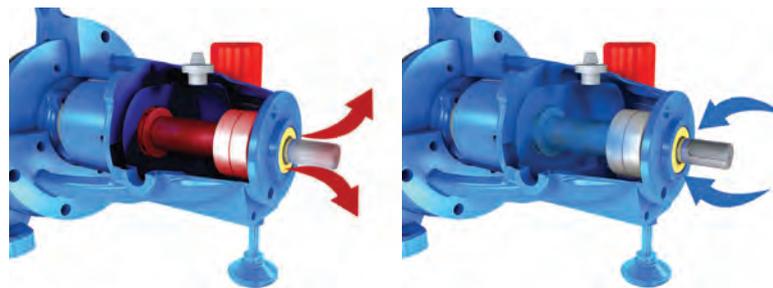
When equipment rotates, the bearing housing heats up and the oil/air mixture expands, forcing air through the seal. As the equipment cools, the oil/air mixture contracts, and air is sucked into the housing, laden with dust, moisture and other harmful substances.
